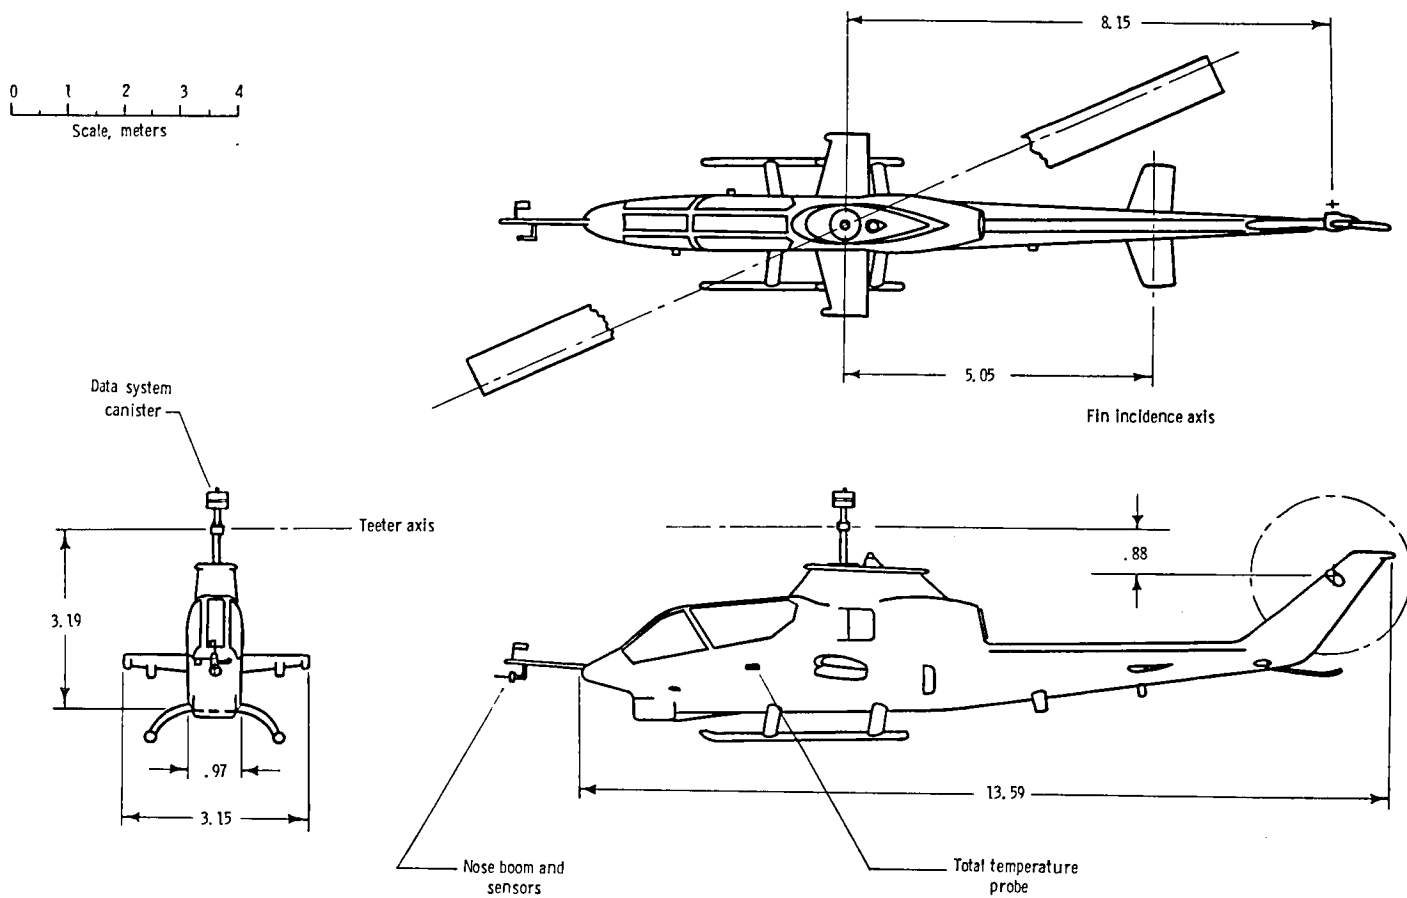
Three-view scale drawing of aircraft. All dimensions are given in meters.
